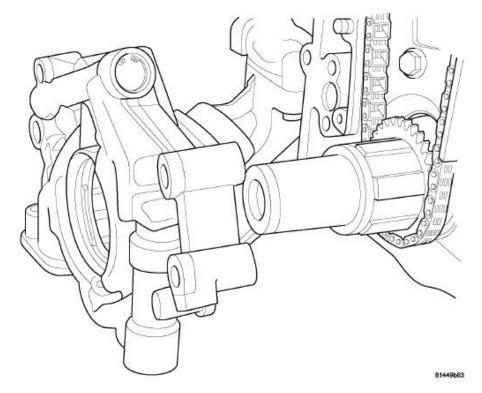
OIL PUMP REMOVAL/INSTALLATION Courtesy of CHRYSLER LLC
